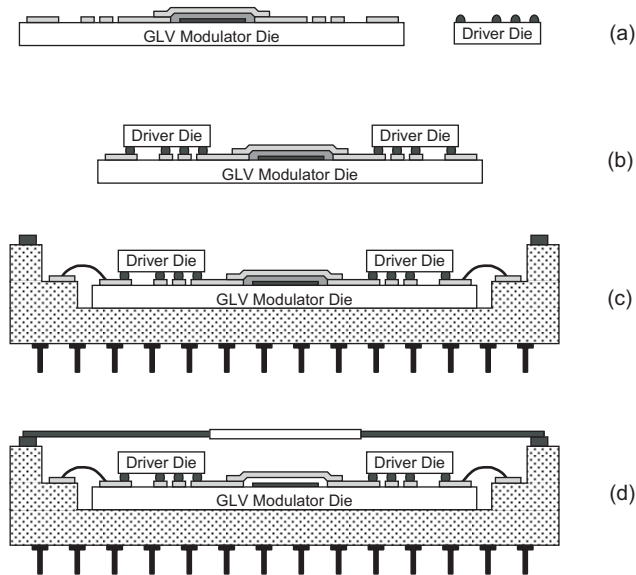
Fabrication and packaging for the optical microsystem. (a) CMOS driver die fabricated and solder bumped and GLV modulator die fabricated with nitride and aluminum beams over a poly-Si sacrificial layer. (b) Driver die are flipped onto the GLV modulator die. (c) The GLV die assembly is packaged (d) The poly-Si sacrificial layer is etched and the windowed lid attached.
